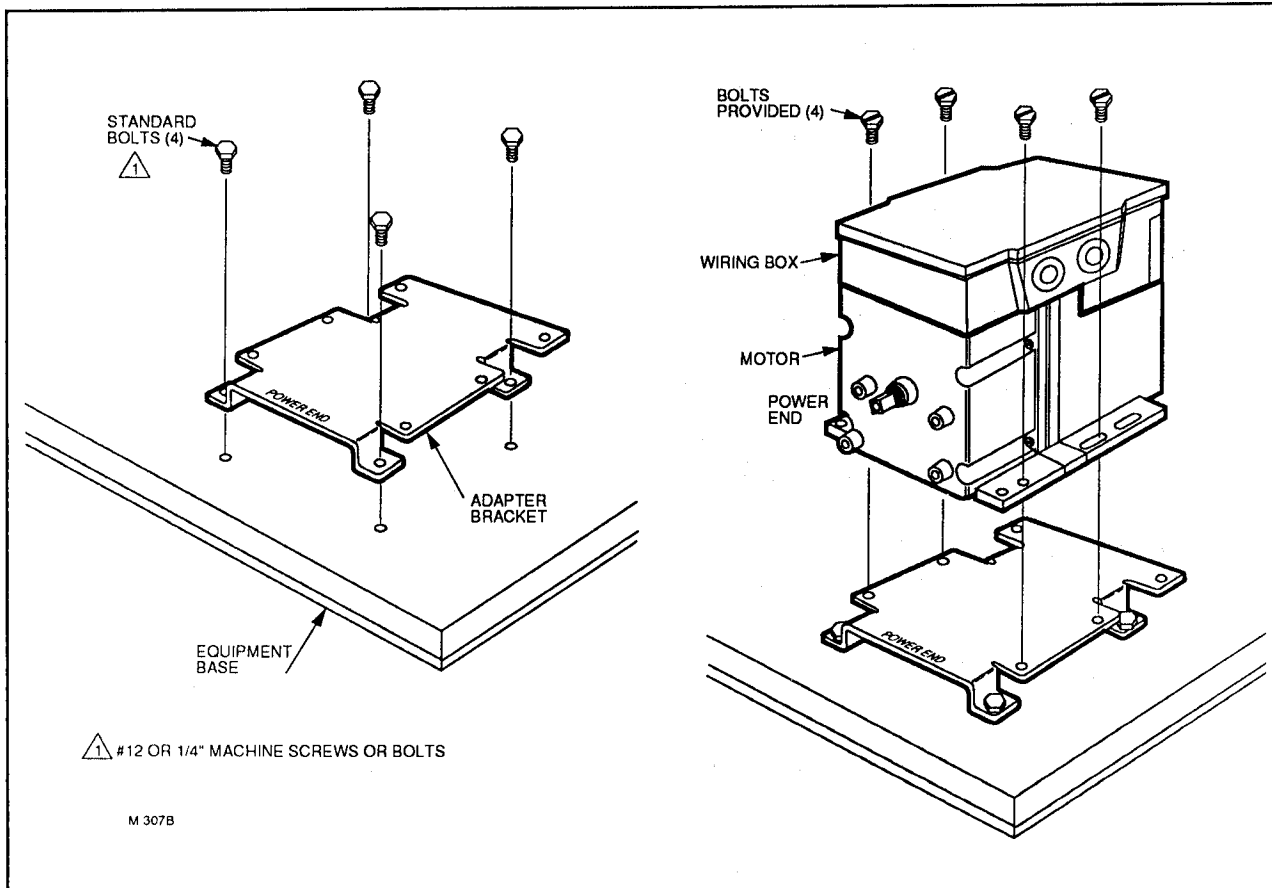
MOUNTING THE MOTOR WITH AN ADAPTER BRACKET. The bracket is first mounted to the equipment with standard bolts. The motor is then mounted to the bracket using the bolts provided with the bracket, which thread into the threaded bracket holes.
